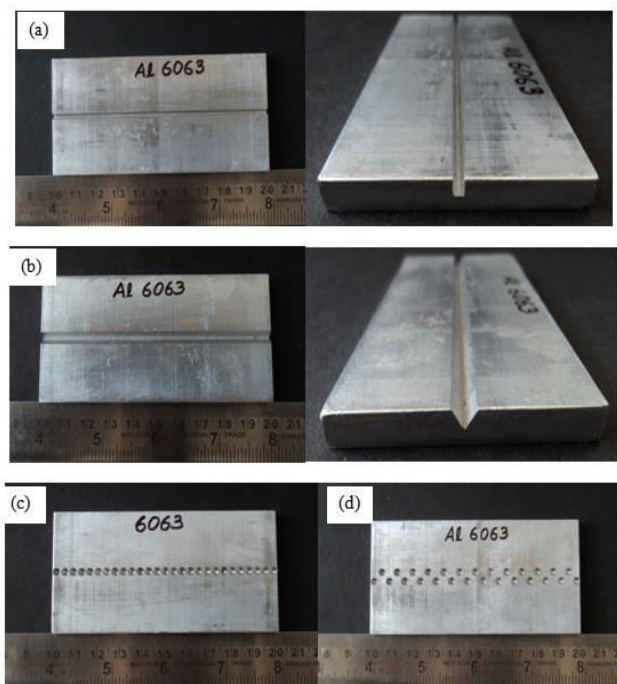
Reinforcing techniques (a) square groove, (b) V-groove, (c) serial holes, (d) zig zag holes.
